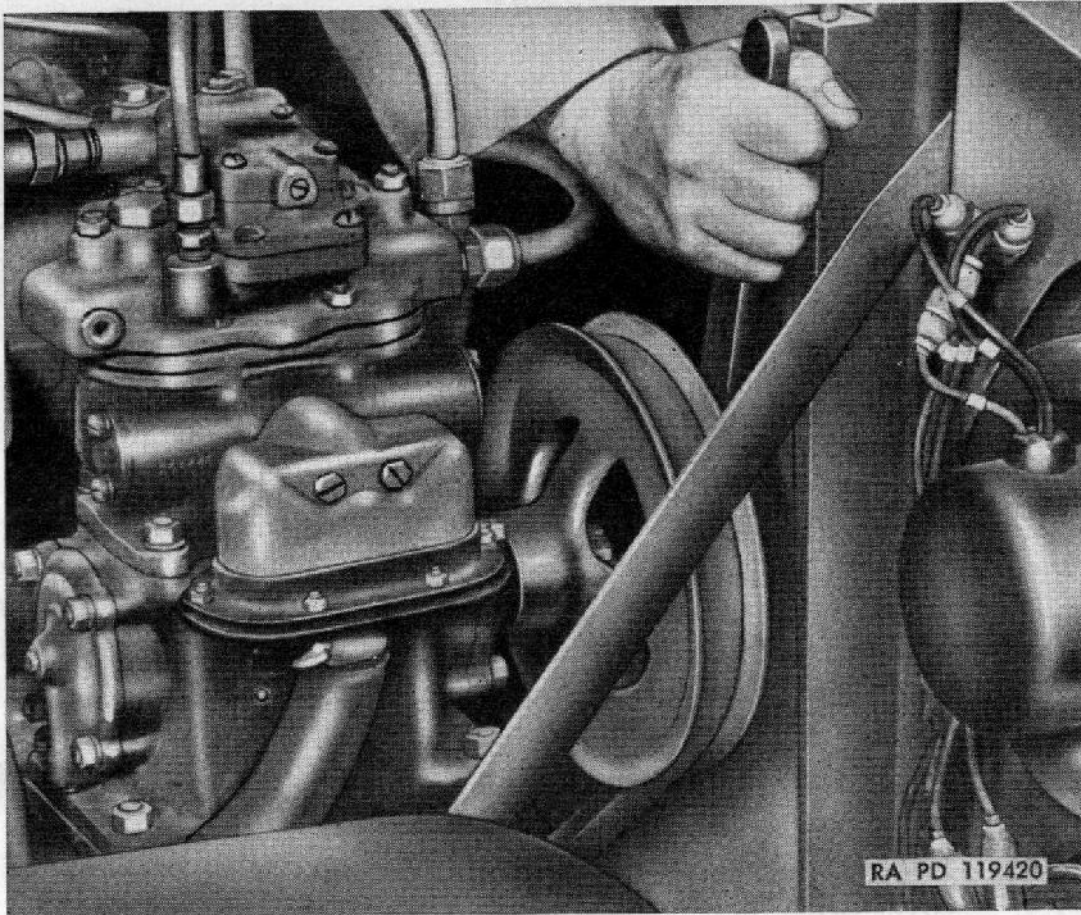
Adjusting air-compressor drive belt with wrench 41-W-3250-510.
